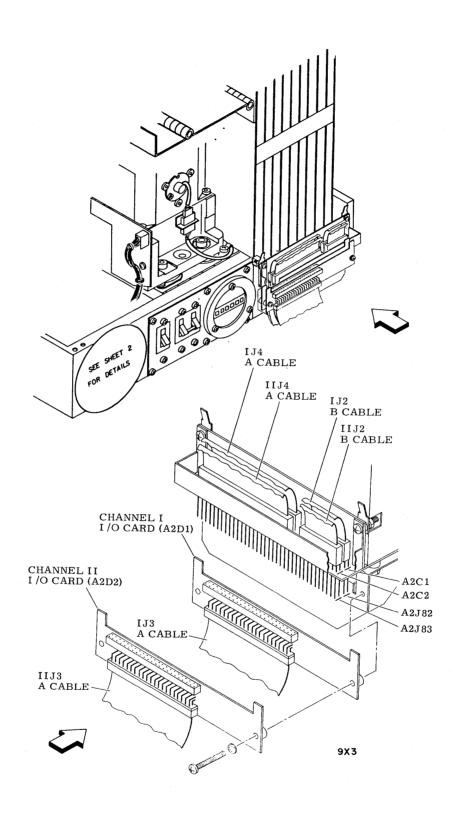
Cable Installation - Parts Location View (Sheet 1 of 2)
